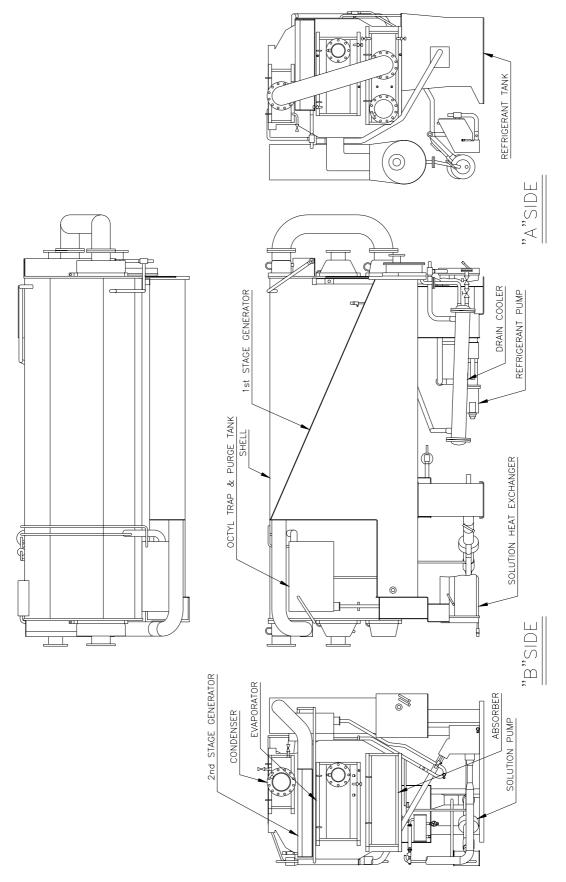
Assembly drawing(AR-W220~800G2)
